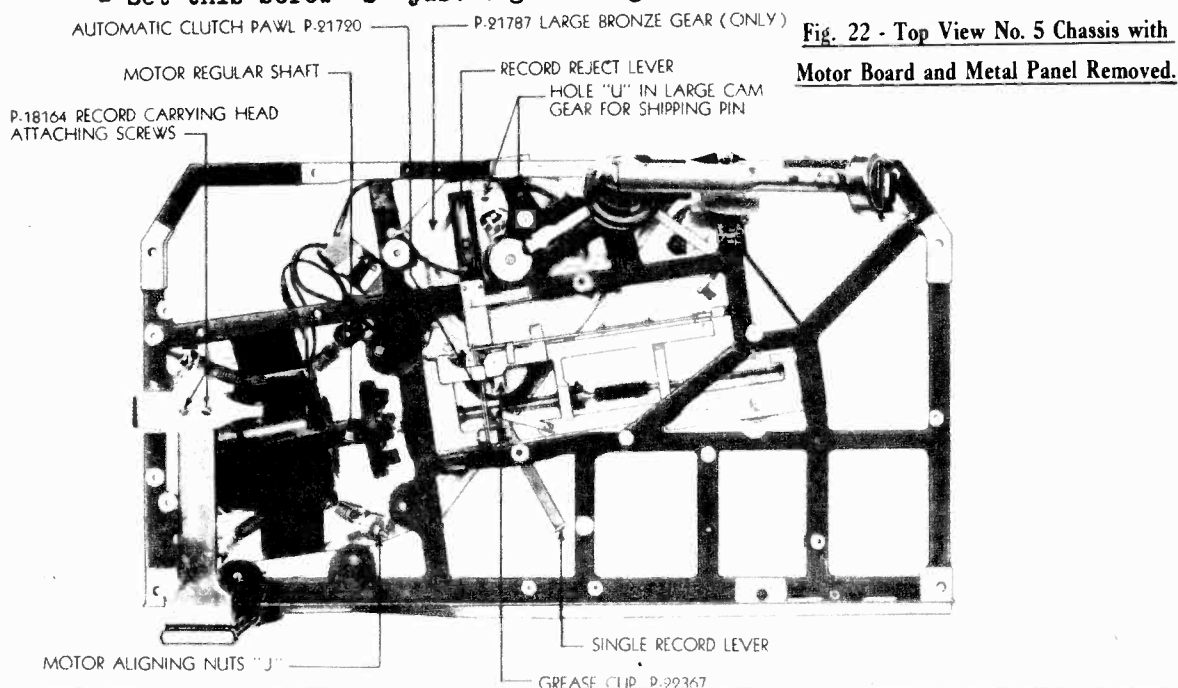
Top View No. 5 Chassis with Motor Board and Metal Panel Removed.
